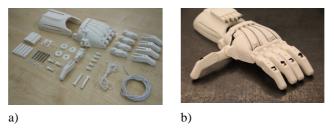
a) 3D printed parts and other components necessary to assemble a low cost prosthesis (e-NABLE project) concept; b) The Raptor Hand prosthesis [2].
